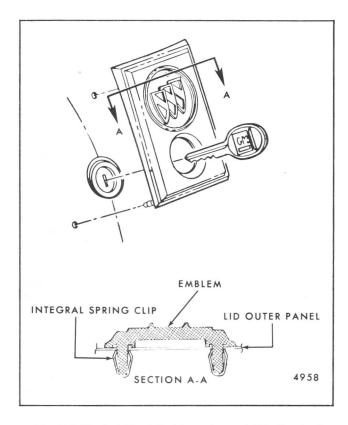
Typical Fixed Emblem - Integral Clip Retained
